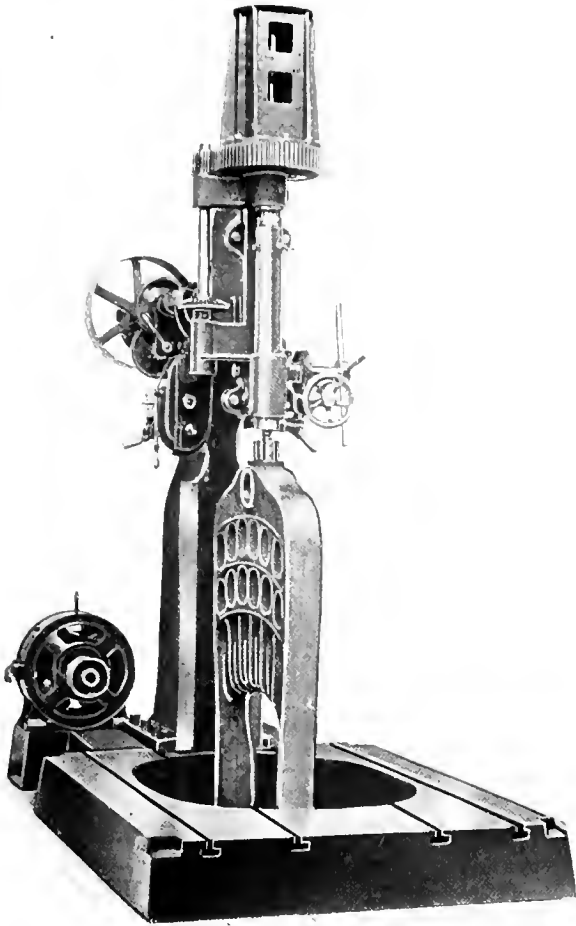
View of Reaming and Tapping Machine, showing Pit in Base permitting High Work to be operated on.
